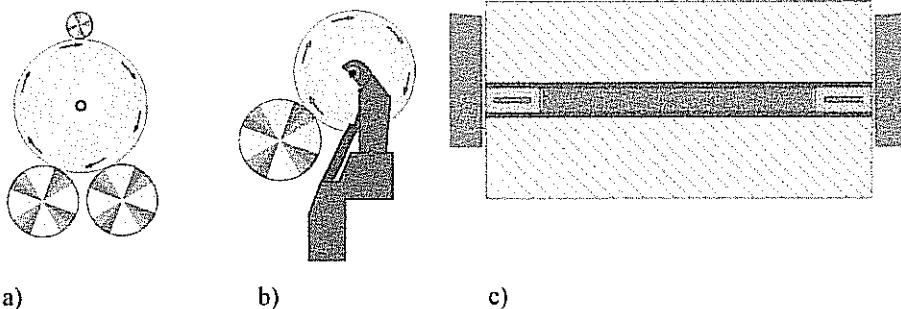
Two-drum winder a), center-surface winder b), printing press unwinder c)
